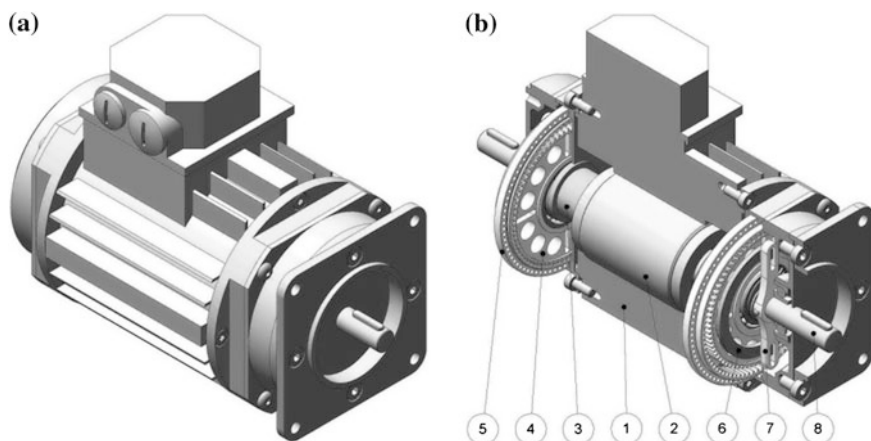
a Electric motor with integrated gearbox. b Internal structure: 1—stator with stator winding. 2—Rotor. 3—Eccentric cam. 4—Planet wheel. 5—Central gear with internal teeth. 6—Oldham coupling. 7—Output shaft carrier. 8—Continuous output shaft
